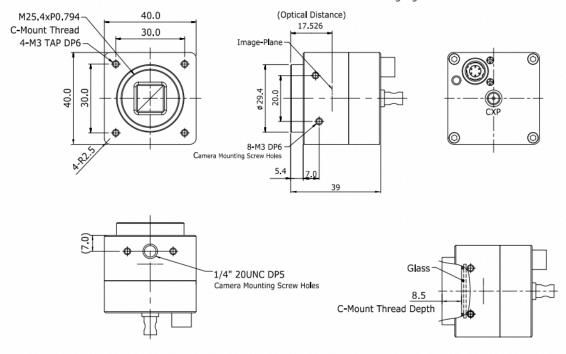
VC-4MX-M144F Mechanical Dimension
